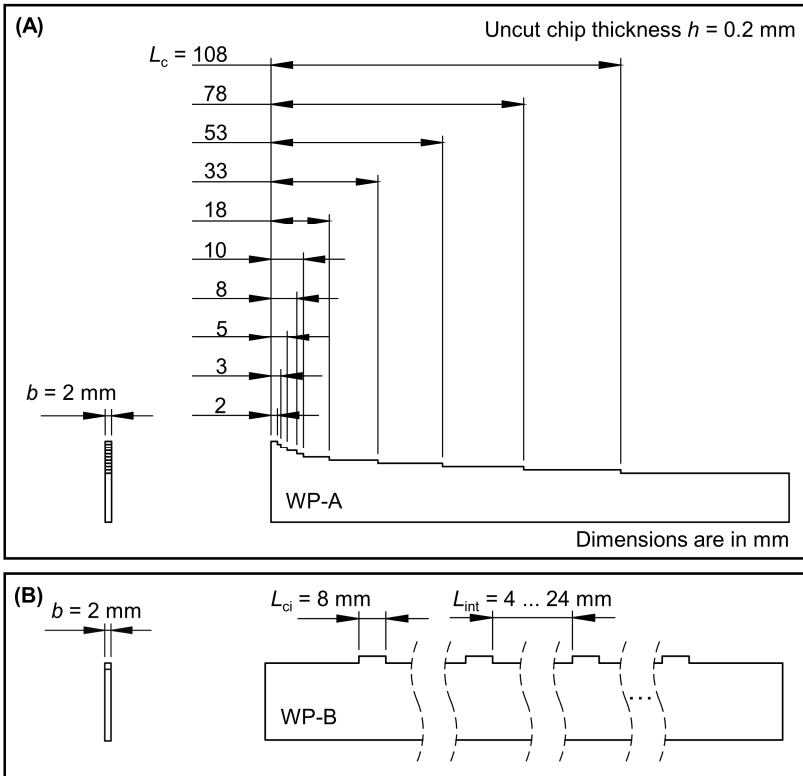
Workpieces geometry, (A) Stepped workpiece allowing for variable cutting lengths, (B) Slotted workpiece allowing for variable interruption length; (Alammari et al., 2023)
